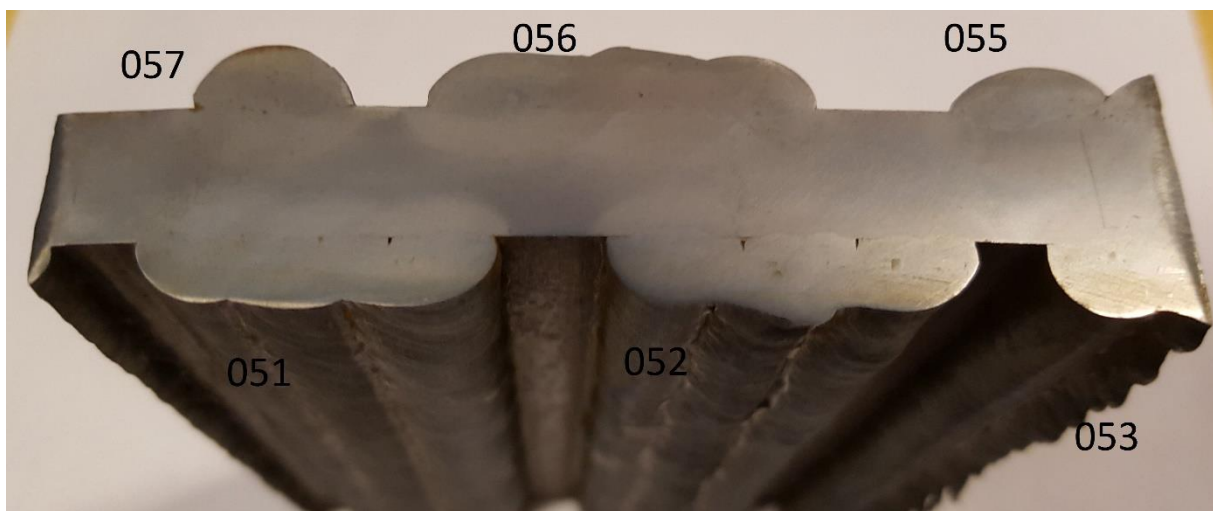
Inspection of welds 051, 052, 055, 056 and 057
